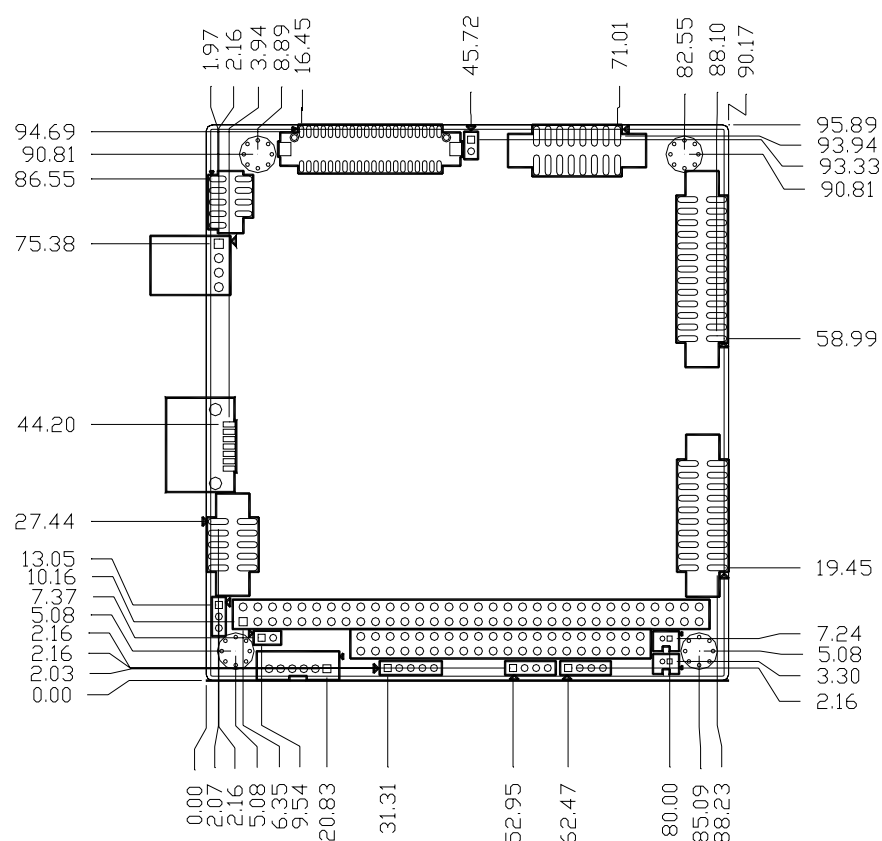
PCM-3355 Mechanical Drawing (Component Side)
